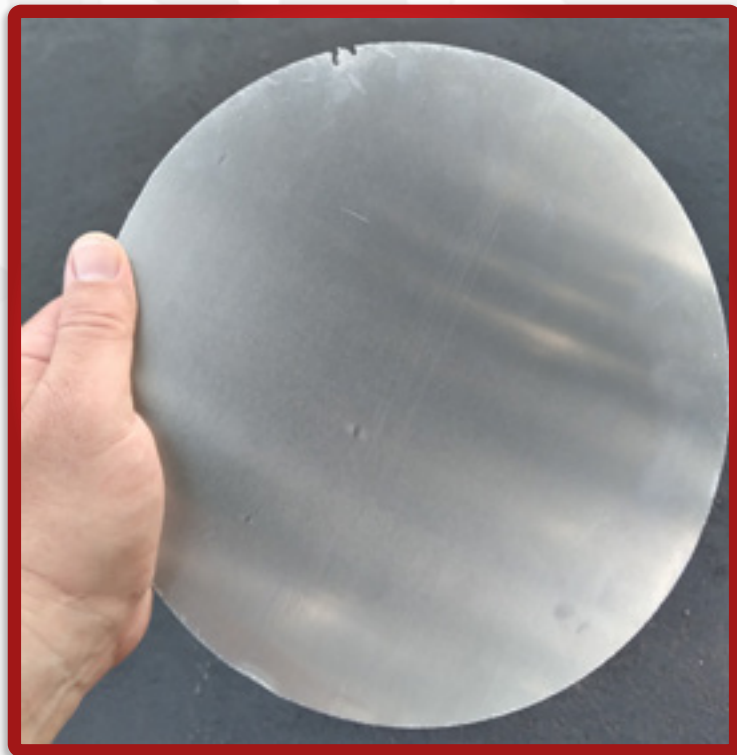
10-INCH DIAMETER SHEET ALUMINUM BLANK.
